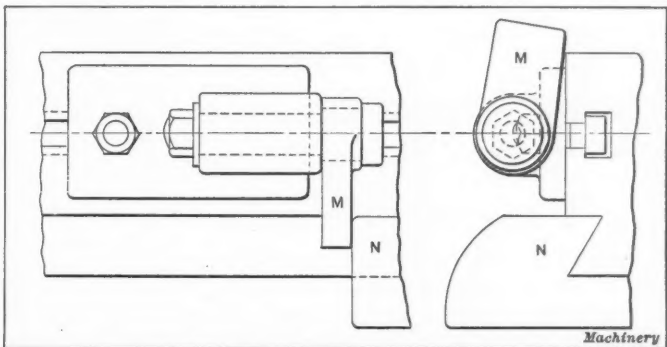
Stop for locating Work under the Center of the Milling Cutter *G
